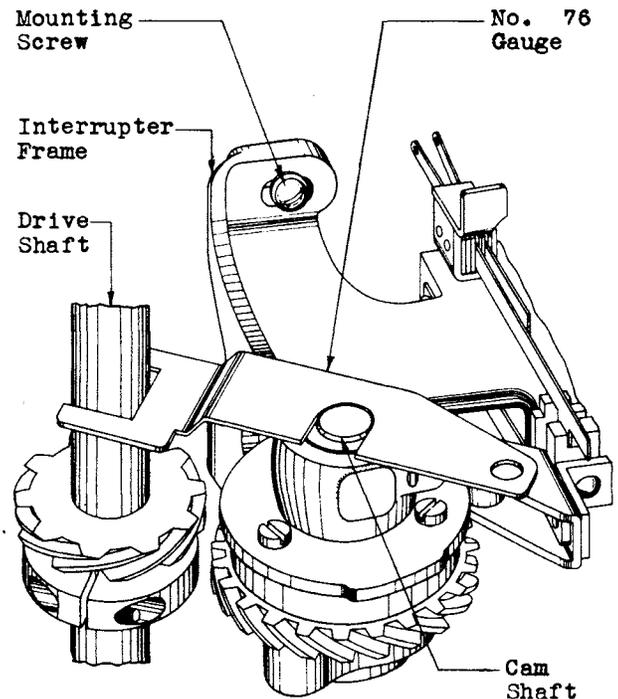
Method of Locating Driving And Cam Shaft Gears
